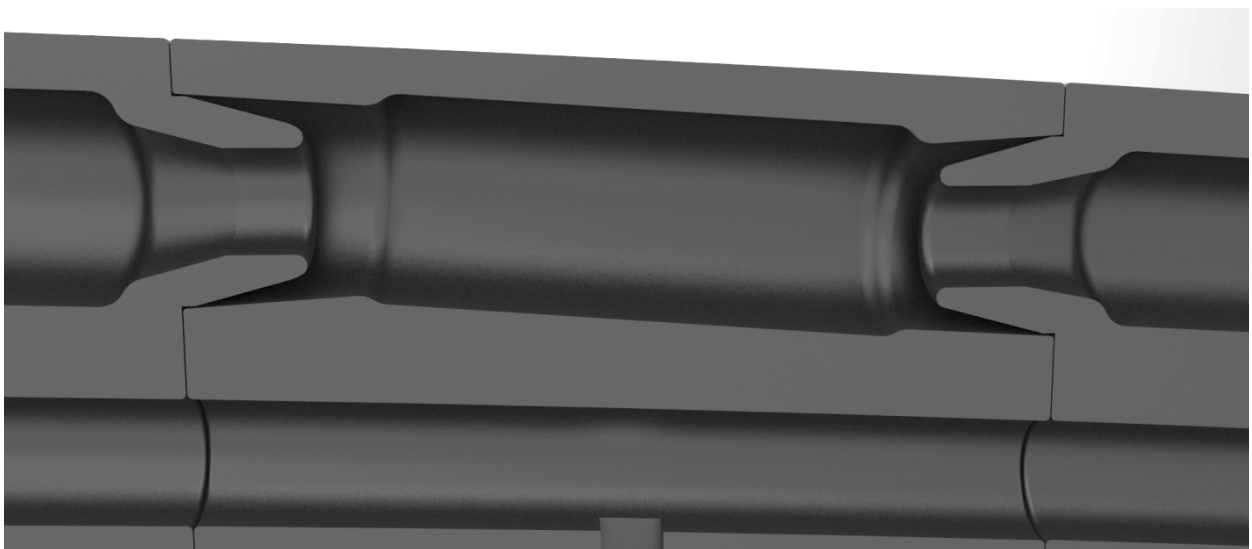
Antenna fitting system in cutaway view without the rubber cord.
